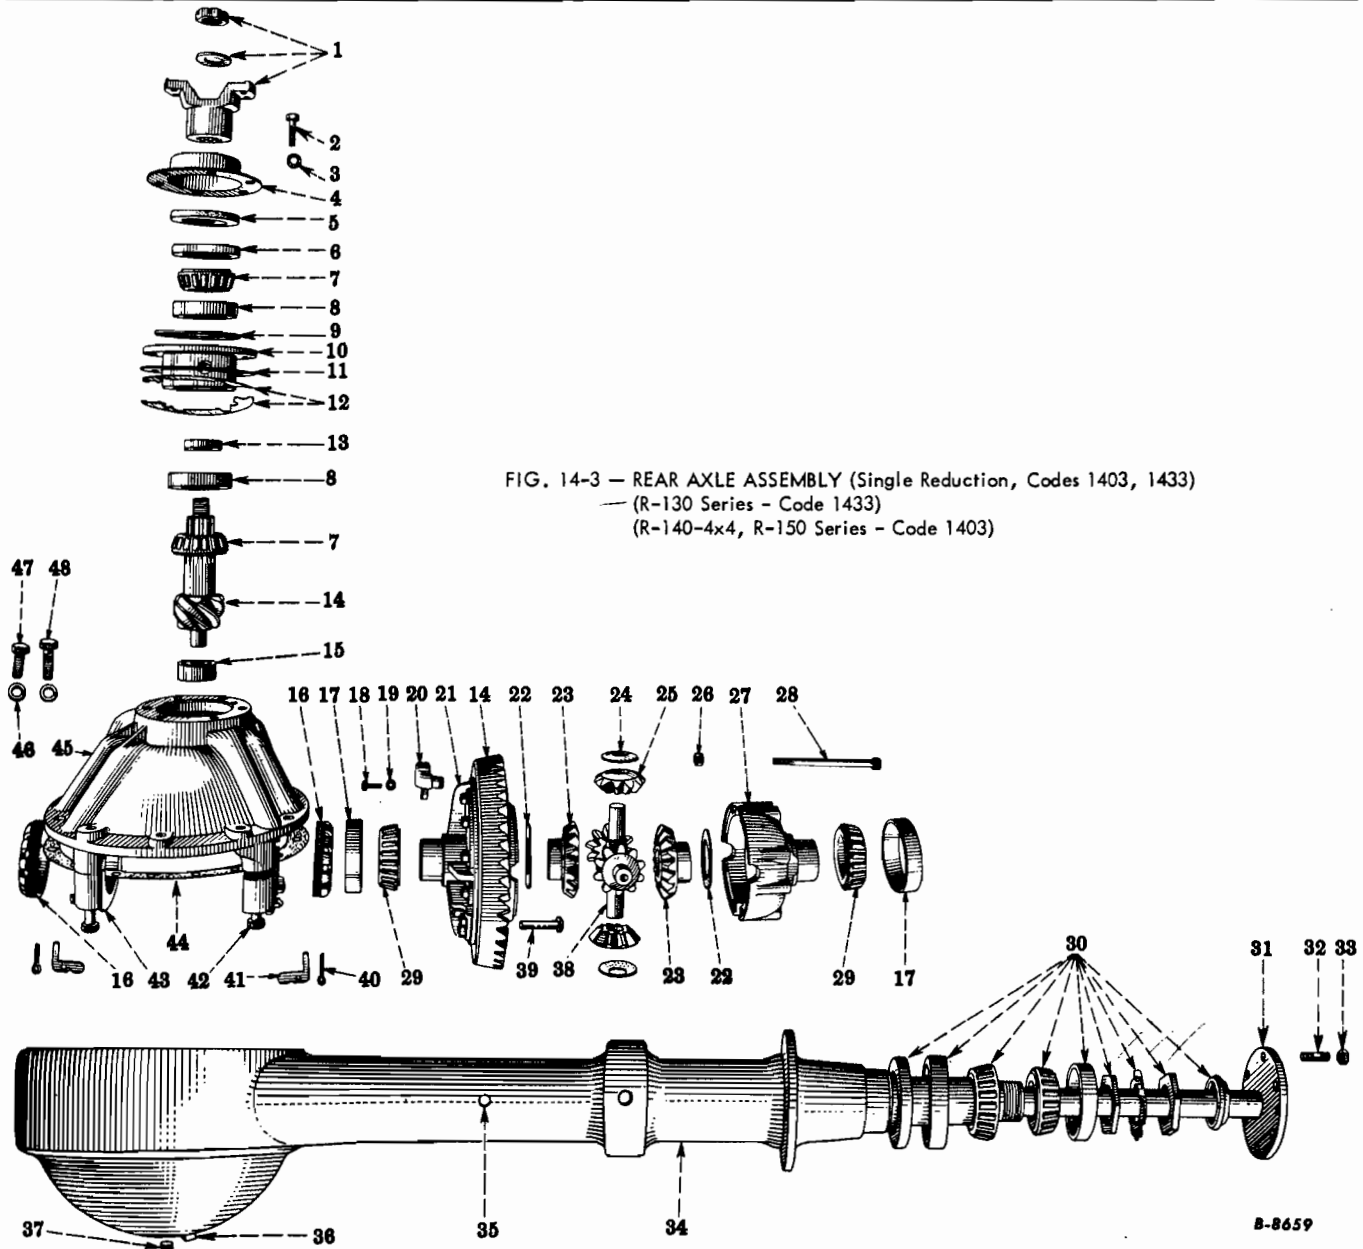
REAR AXLE ASSEMBLY (Single Reduction, Codes 1403, 1433)
